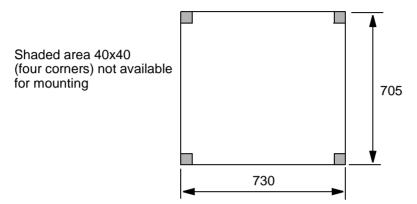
Mounting plate for mounting of equipment (dimensions in mm).
